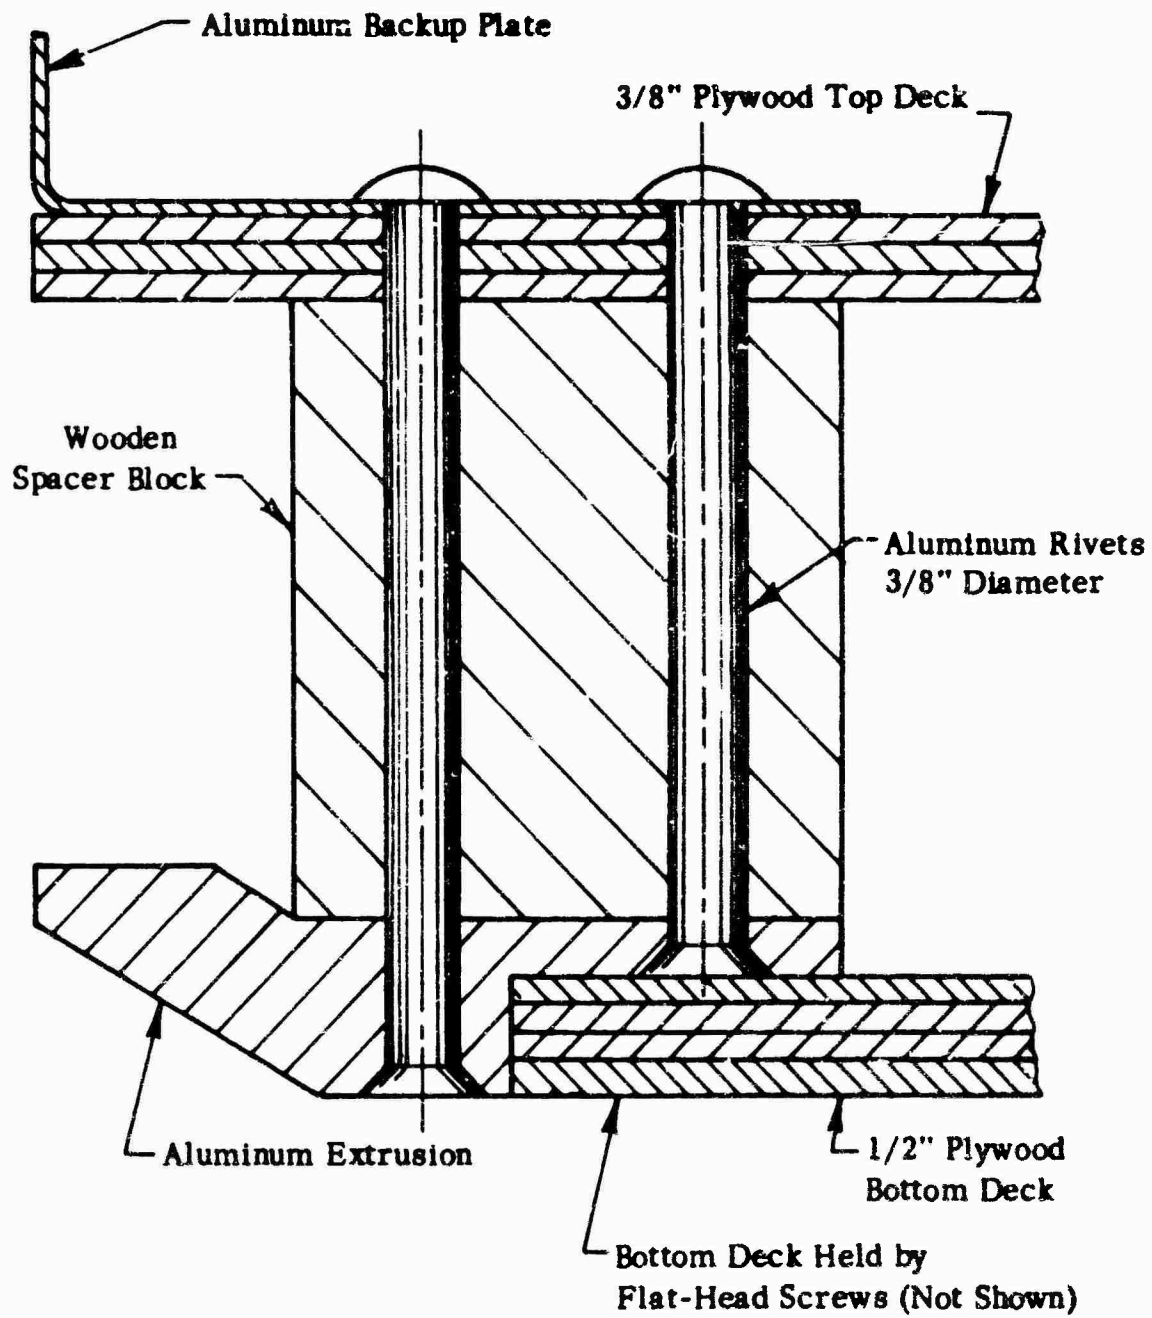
SECTIONAL VIEW OF BASE DESIGN WITH ALUMINUM EXTRUSION AROUND THE BOTTOM DECK
